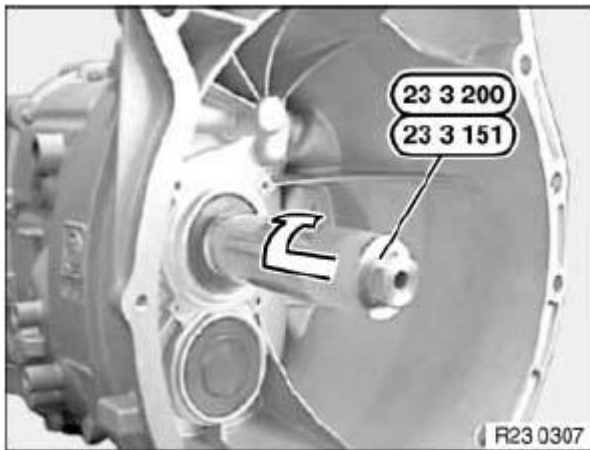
Identifying Special Tools (23 3 200), (23 3 151) And (23 3 220)
